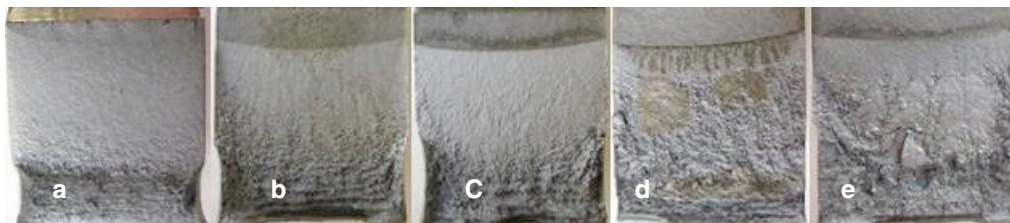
Macroscopic appearance of the fracture surface, X65 specimens (specimen thickness = 20 mm): no hydrogen, R.T. (a); hydrogen charged, R.T. 10 Hz (b), and 1 Hz (c); hydrogen charged, -30°C , 10 Hz (d), and 1 Hz (e)
